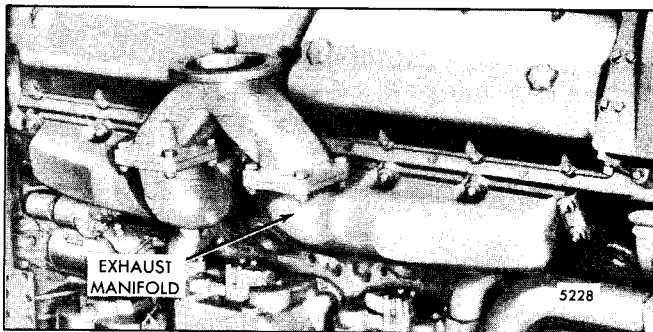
Typical One-Piece Exhaust Manifold Mounting
